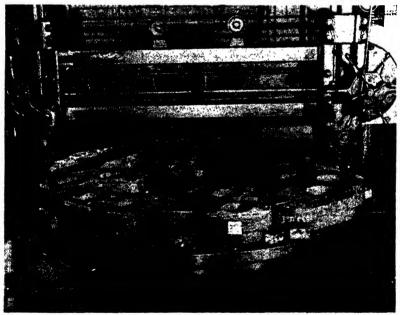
Facing large crankshaft webs on a vertical boring mill.
